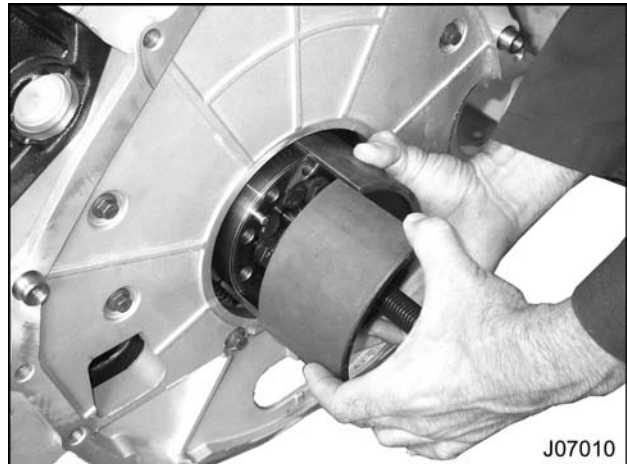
Installing the Rear / Wear Sleeve Removal Tool (CF)
